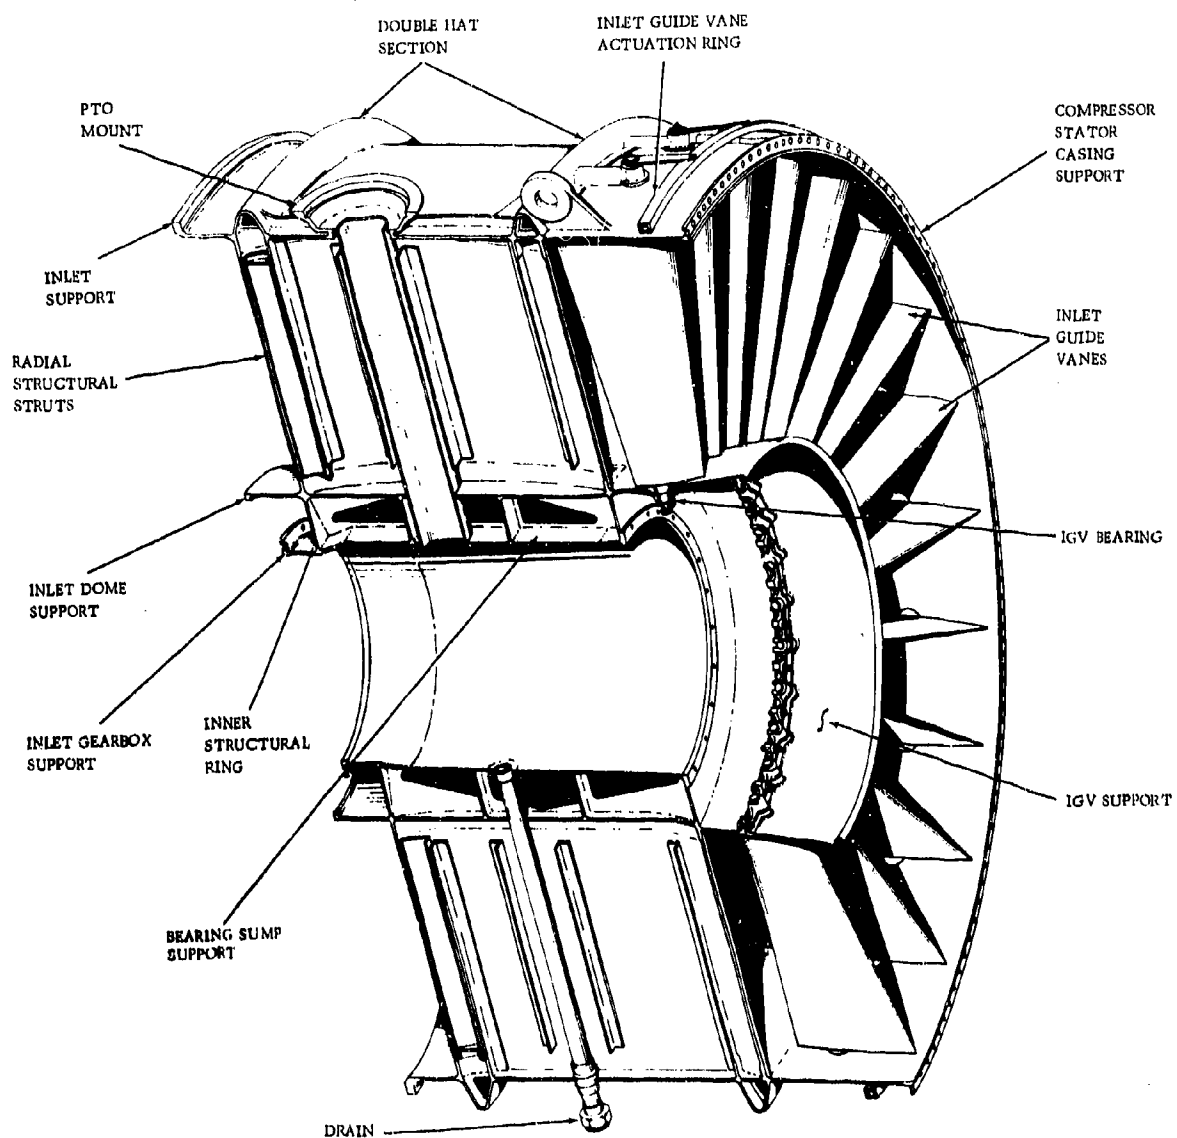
(B). COMPRESSOR FRONT FRAME ASSEMBLY
